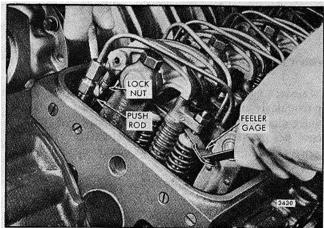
Adjusting Valve (Clearance (Spring-Loaded Valve Bridge)
